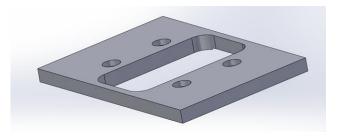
Technical Drawing of the Mold with a Screw-Fixed Cover
